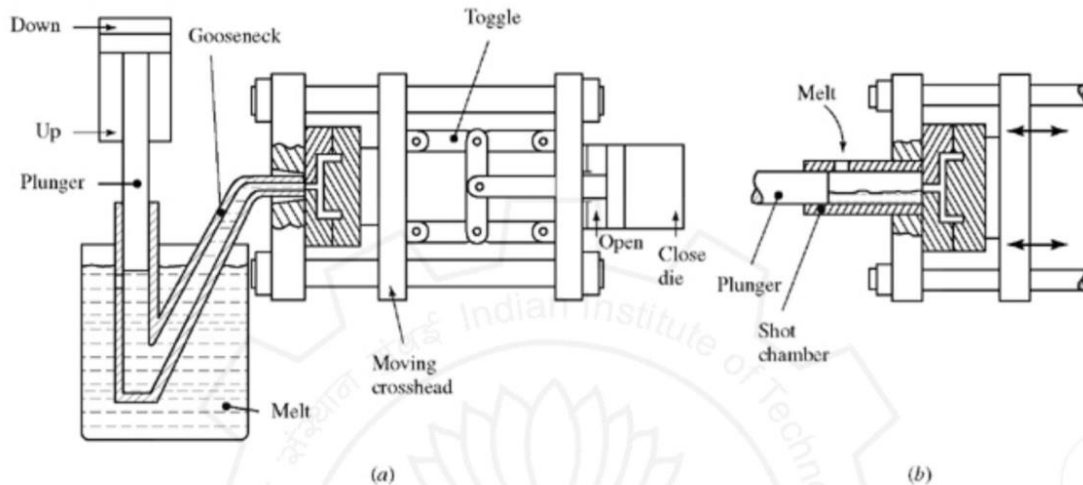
Set-up of (a) hot-chamber and (b) cold-chamber die casting processes [U₁]
